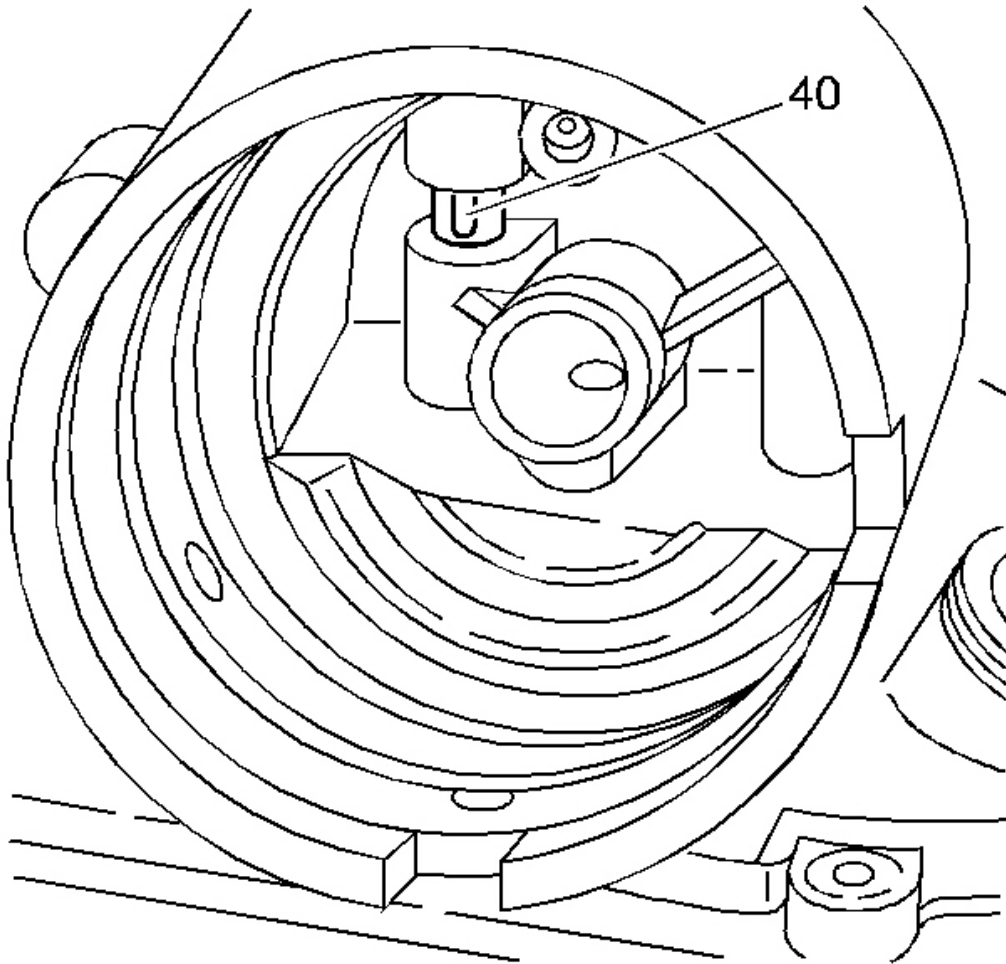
Aligning Third Accumulator Retainer And Ball Assembly With Retainer Slot
